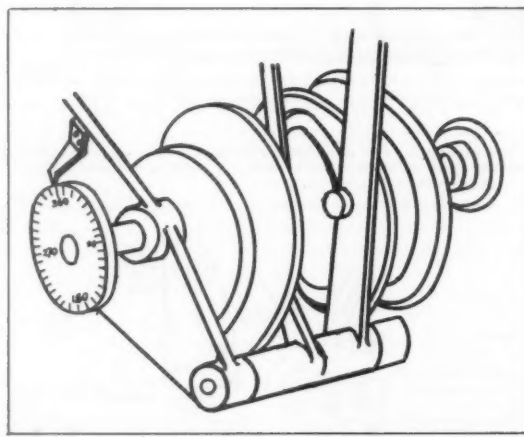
Graduated disc placed on camshaft and with pointer fixed to machine
